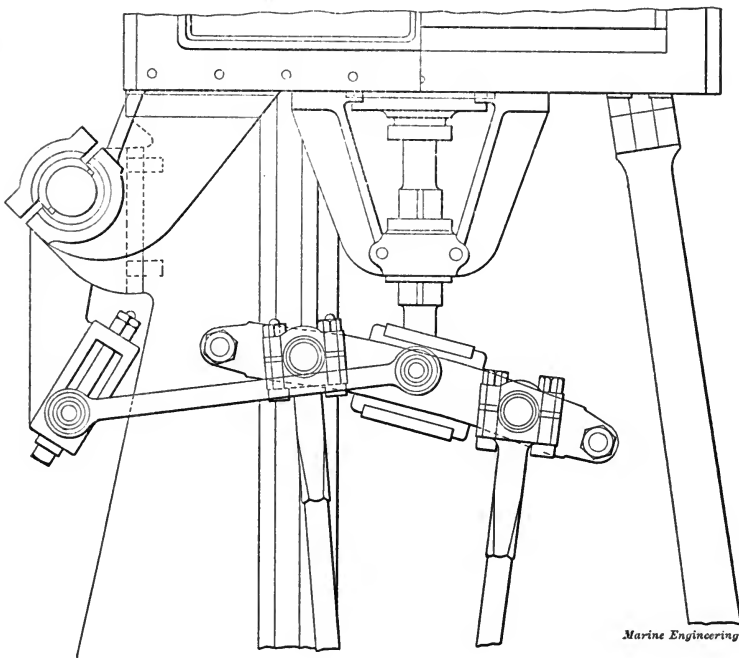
Arrangement of Stephenson Link and Rock Shaft Connections.
